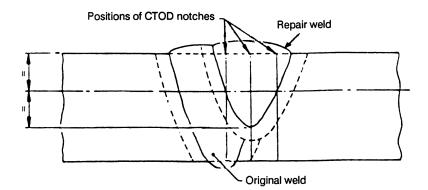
Position of Crack Tip Opening Displacement Specimen Notch for Assessing Partial-Penetration Repair Weld.
